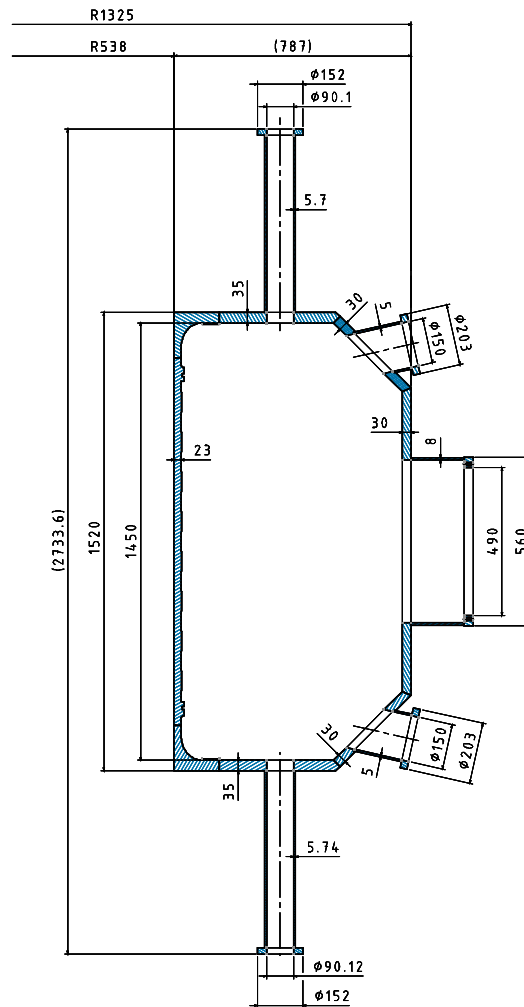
Basic dimensions and parameters of the VV main body weldment
